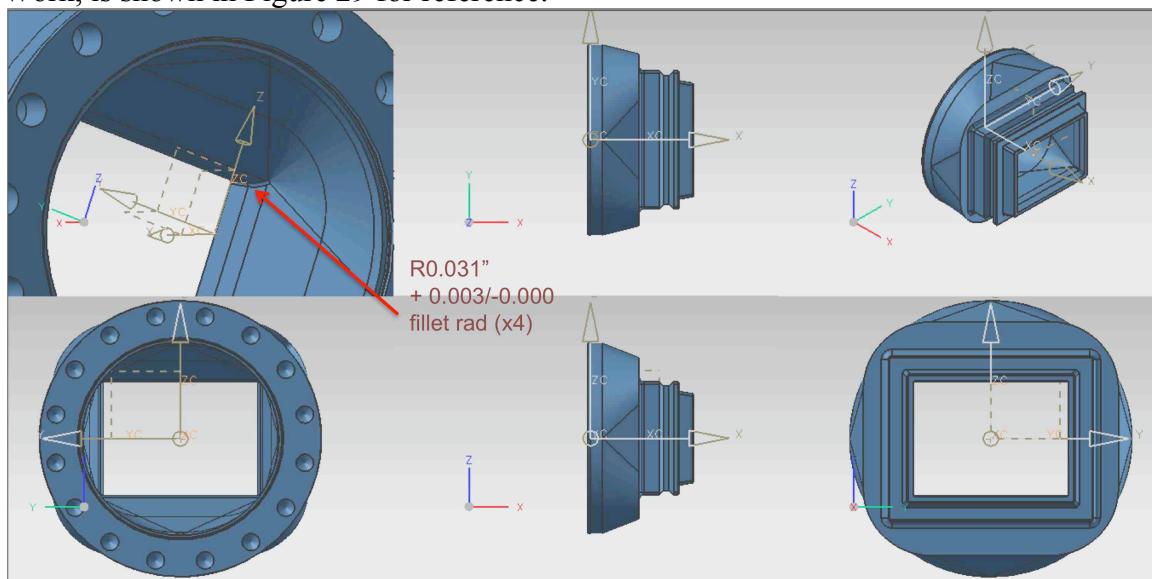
GOVERNMENT FURNISHED EQUIPMENT, PARTID DR2A2--SIX VIEWS
